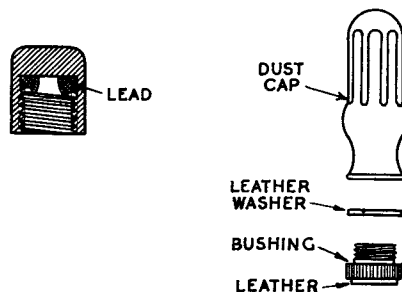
DUST CAP AND METAL SEAT VALVE CAP.
